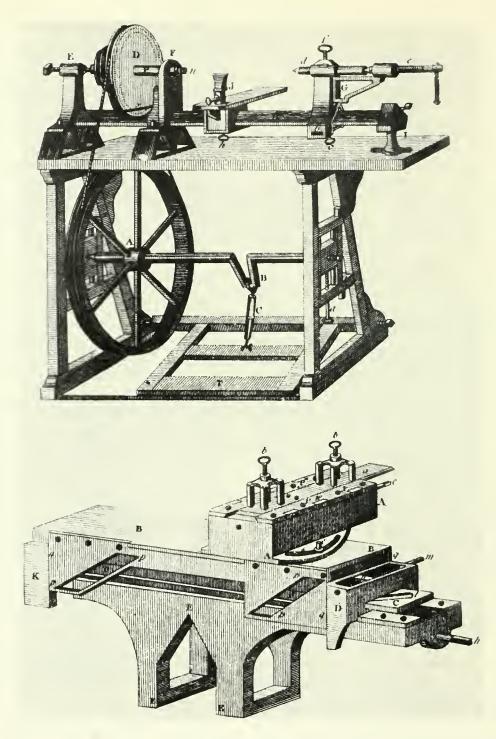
Maudslay's lathe and slide-tool, about 1807. The slide-tool (lower), was fitted over the inverted-V lathe bed, replacing the conventional tool rest, shown installed, above. The cutting tools were secured under the four-legged yokes by thumbscrews b, b. From Olinthus Gregory, A Treatise of Mechanics, 3d ed., 3 vols. (London, 1815), vol. 3, pl. 36.
